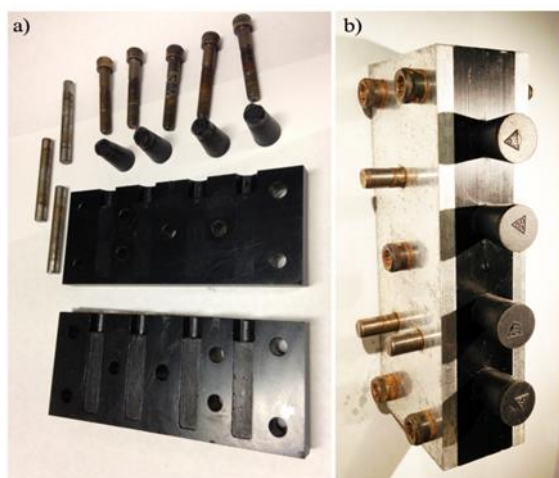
Pictures of Delrin molds used in the synthesis of crosslinked PMMA samples a) mold taken apart showing rectangular mold area b) mold fully assembled.
